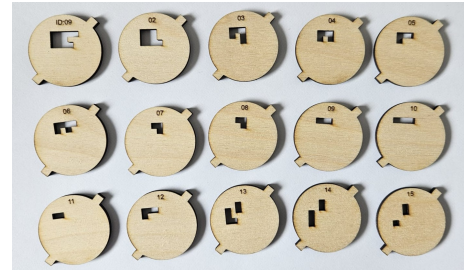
Manufacturing of AM samples - individual layers before assembly for sample ID:09.
